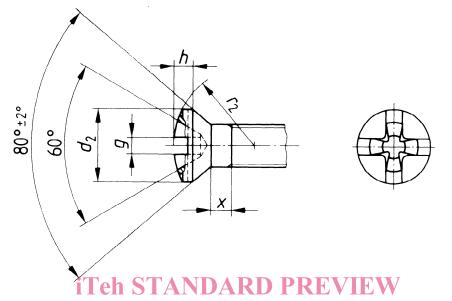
Screw head with combined cruciate slot and cross-recessed drive connection
